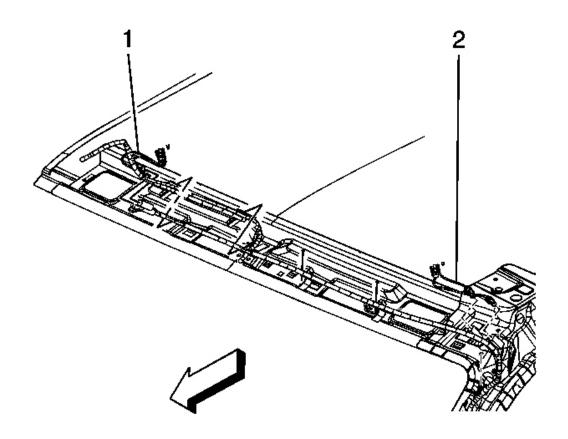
View Of Coax Cable & Digital Radio Connectors (UE1, U2K) Courtesy of GENERAL MOTORS CORP.
